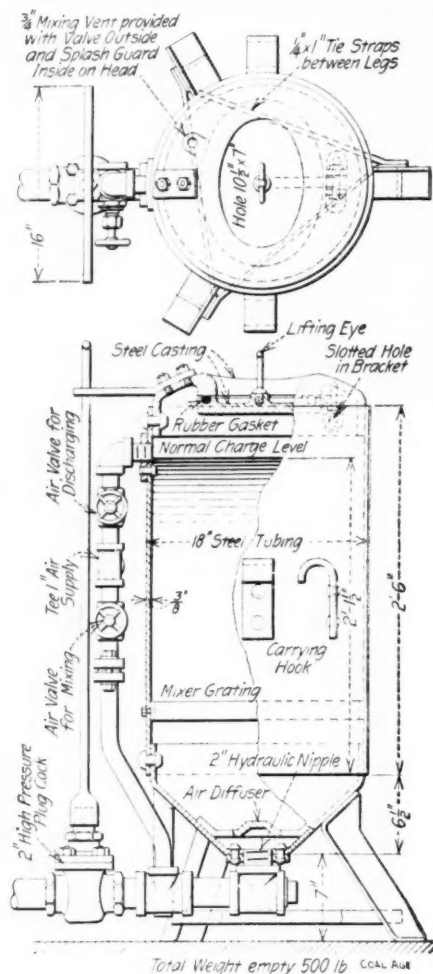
GROUT MIXING TANK AND CONNECTIONS
